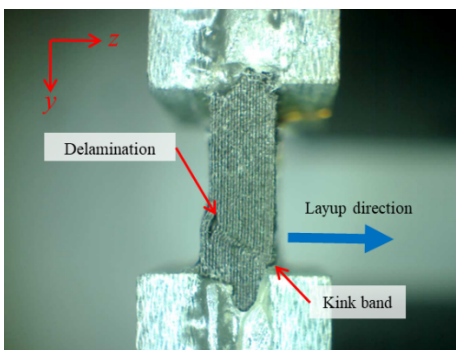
Compressive failure configurations of type A specimen printed with sCFRP.
